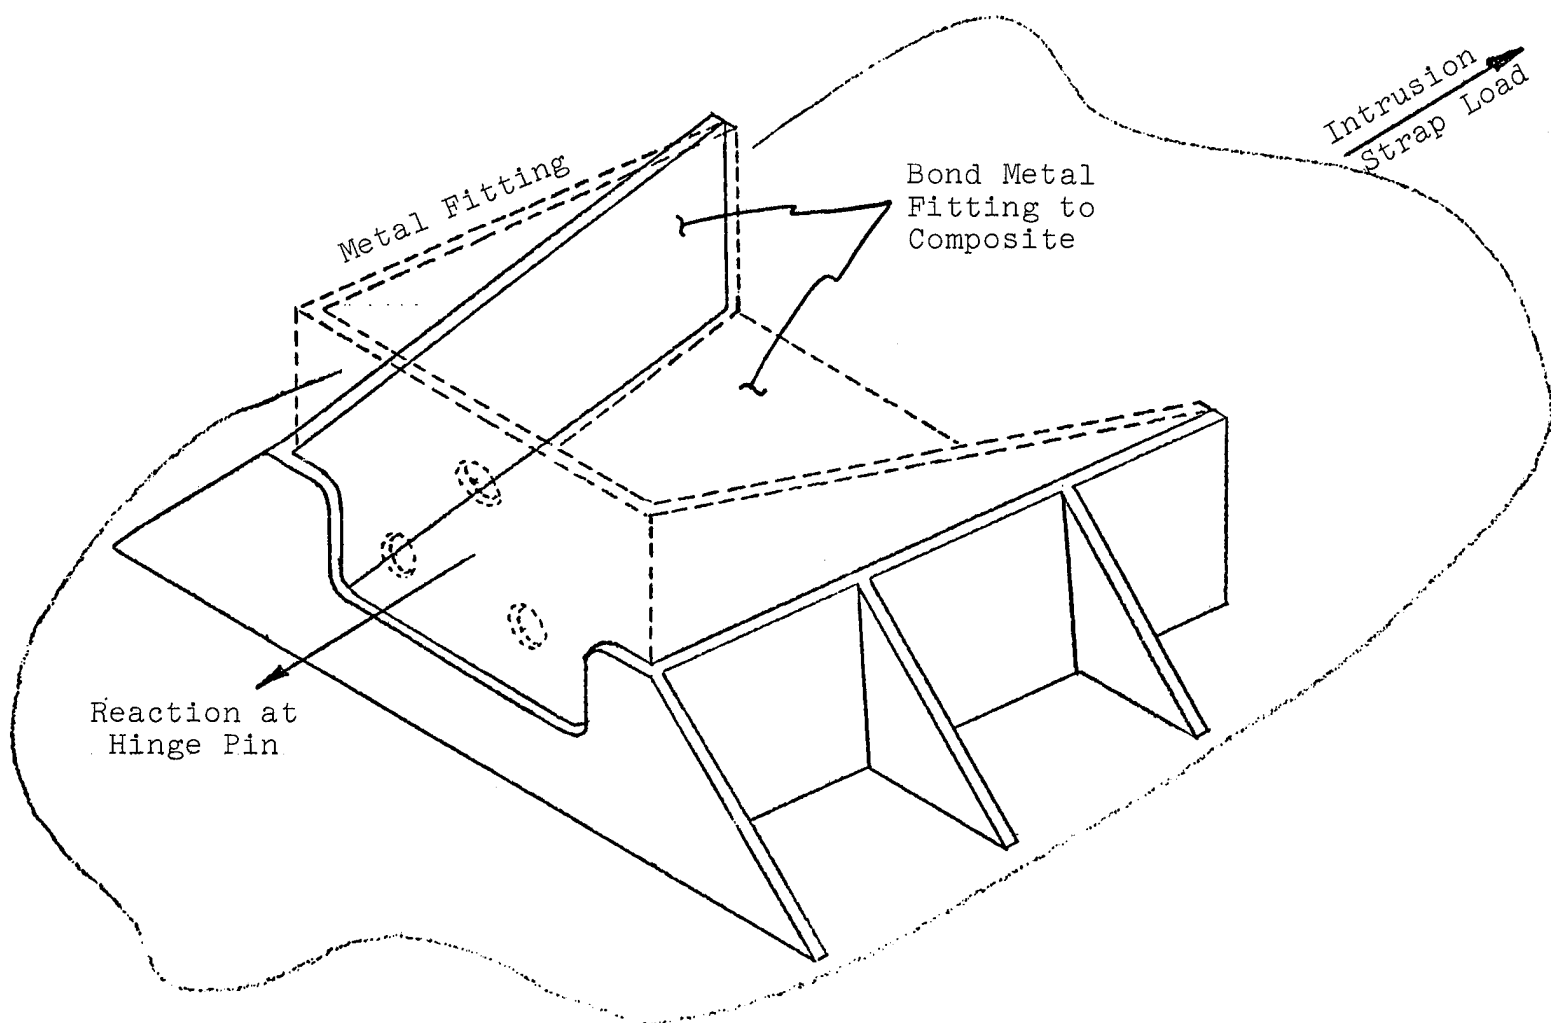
HINGE ATTACHMENT FITTING TO
